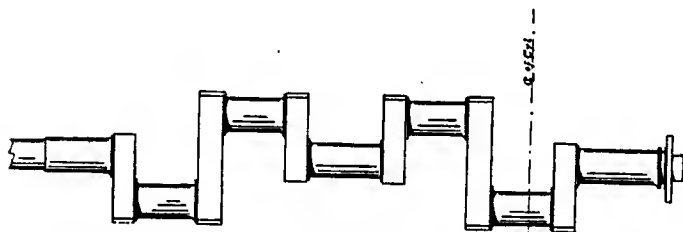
Three-bearing crankshaft longitudinally offset.
